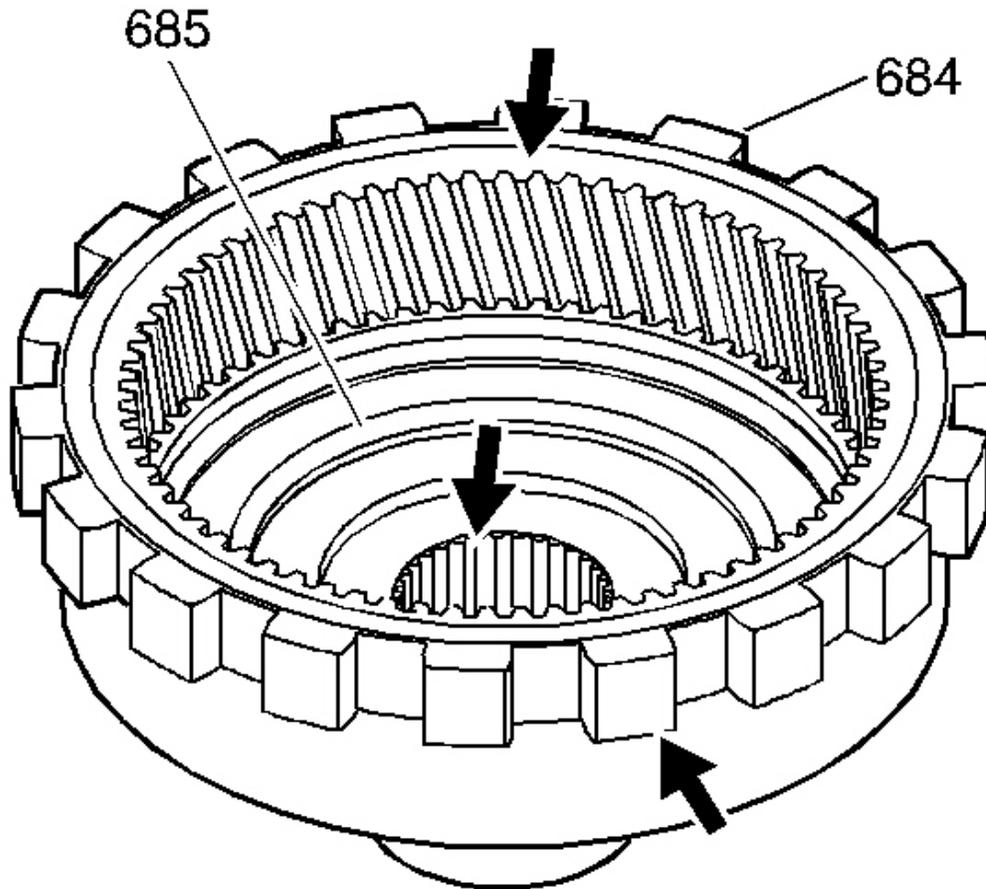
Internal Reaction Gear & Internal Reaction Gear Support
